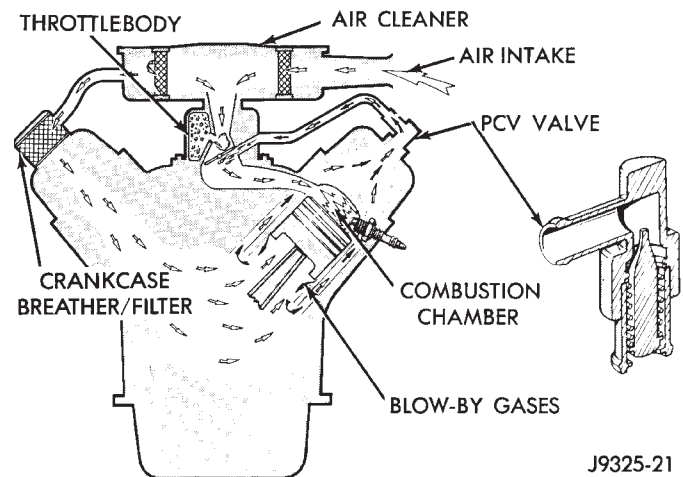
PCV Valve/Hose—5.2L Engines
